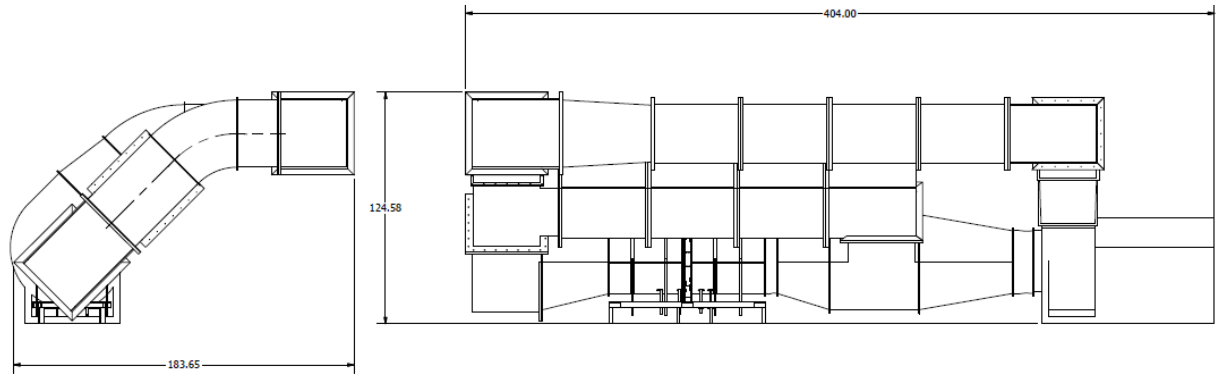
Wind Tunnel Envelope (Units in Inches)
